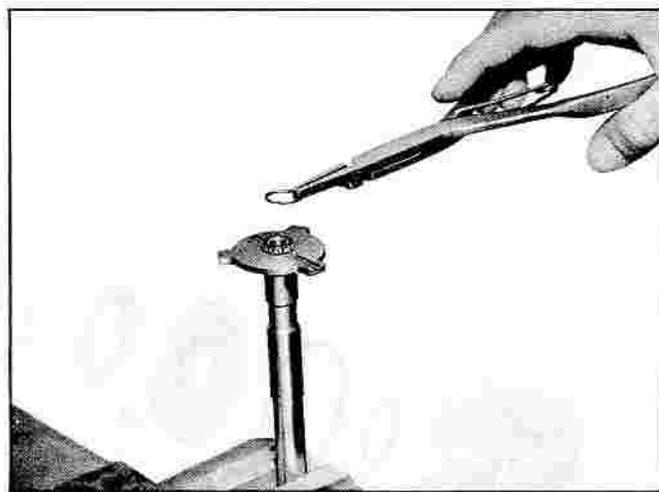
E-39—Installing Front Pump Shaft Thrust Washer Drive Hub Snap Ring
